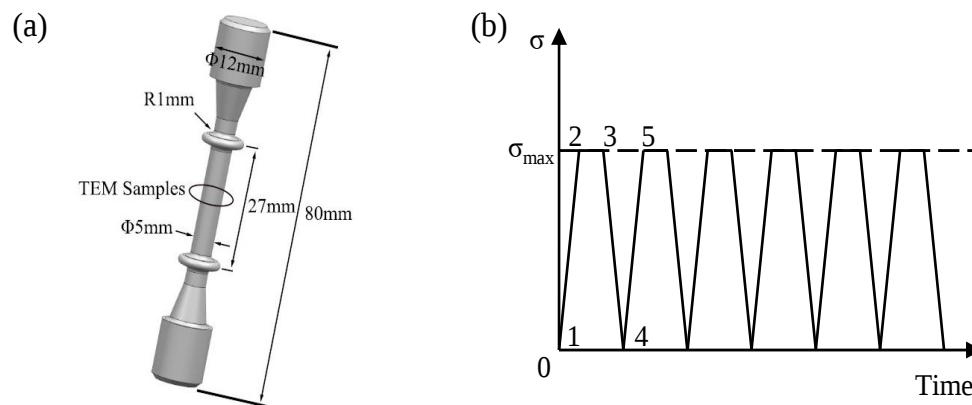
(a) Size and morphology of the specimen in creep-fatigue tests; (b) CF cyclic loading mode.
